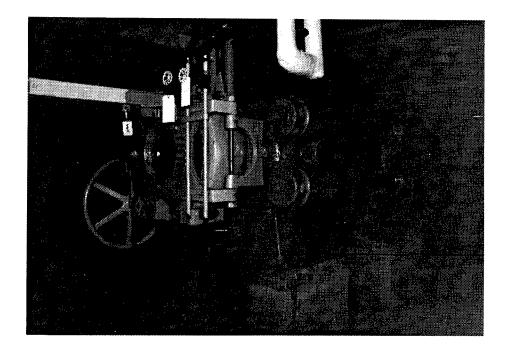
Building 2513-4: This Farquar horizontal press is similar to the Macaroni horizontal press except that it is equipped with extruding dies. Powder was extruded into 175-millimeter propellant.
